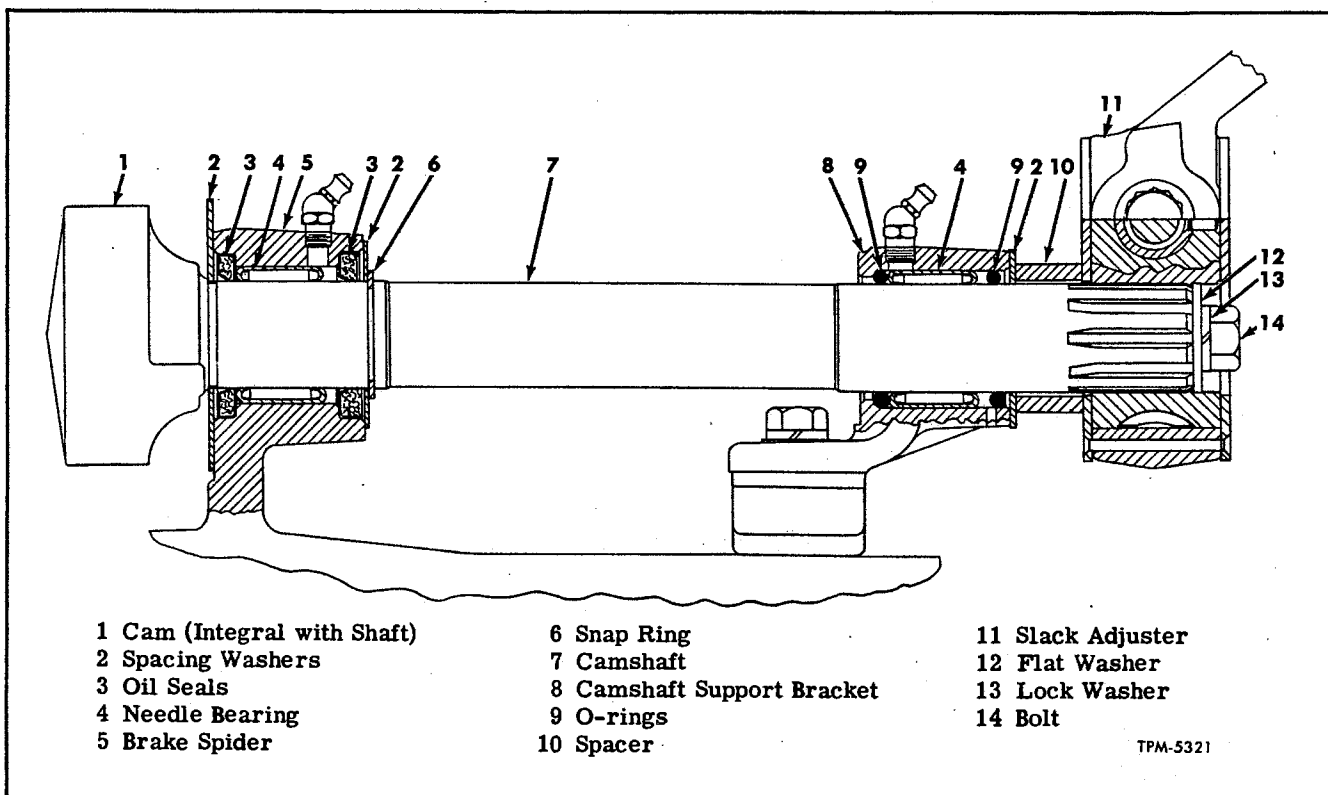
Rear Brake Camshaft and Slack Adjuster Mounting
